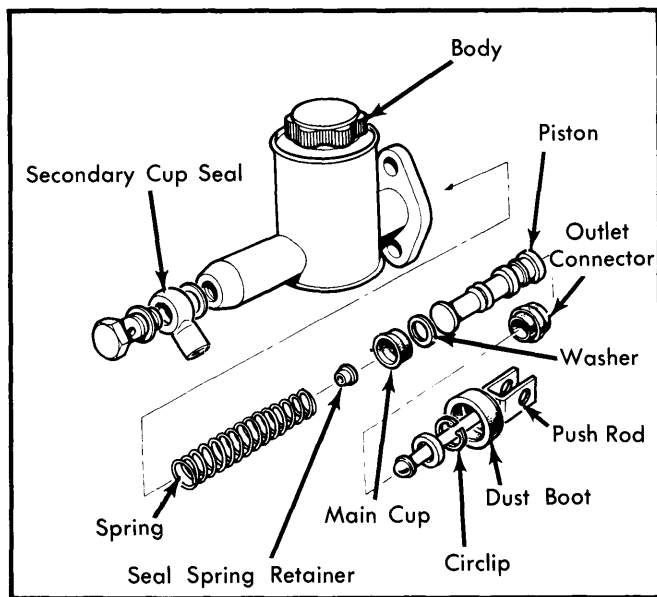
Exploded View of MGB Clutch Master Cylinder
